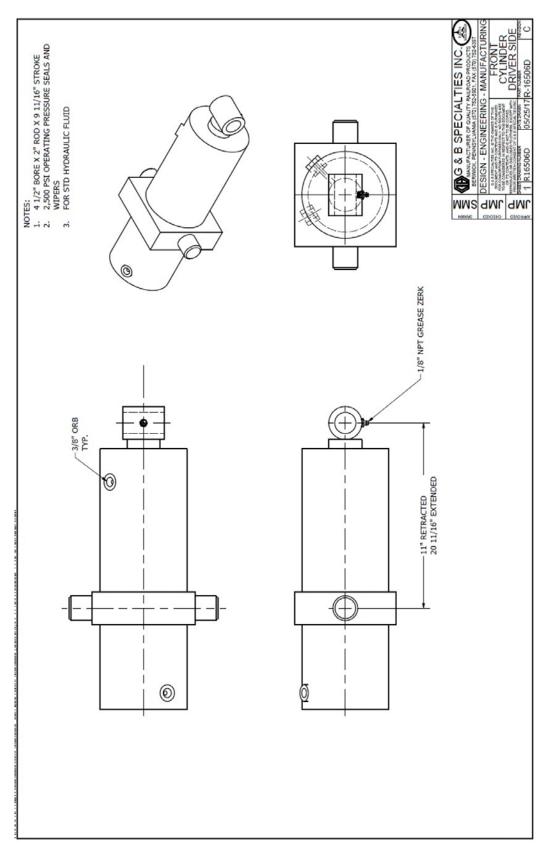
R-16506D (Rotating Front Driver Side Hydraulic Cylinder)
